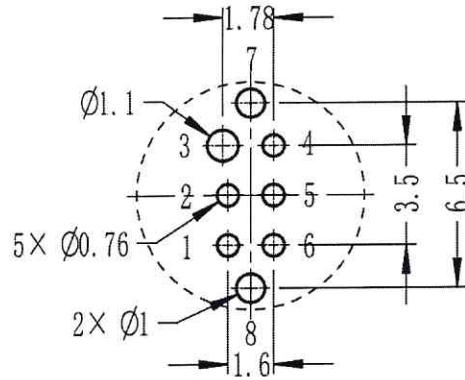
Recommended motherboard PCB layout design dimensions (top view)
